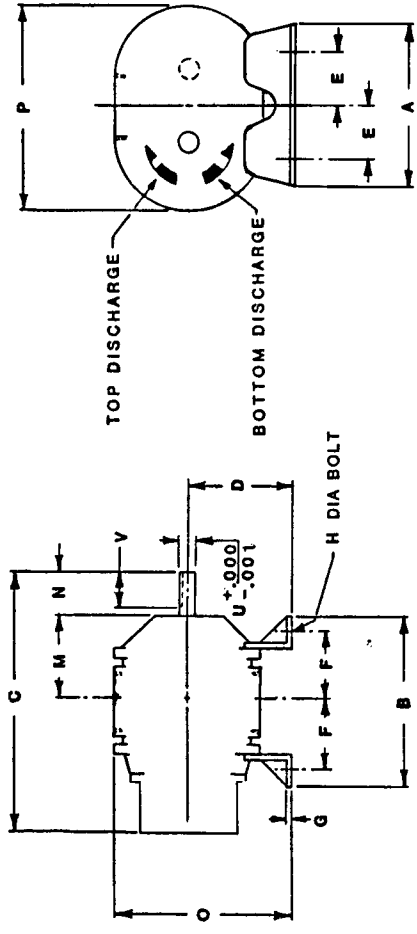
Assembly of UNIVERSAL RAI® blowers, 6" and 7" Gear Diameter
